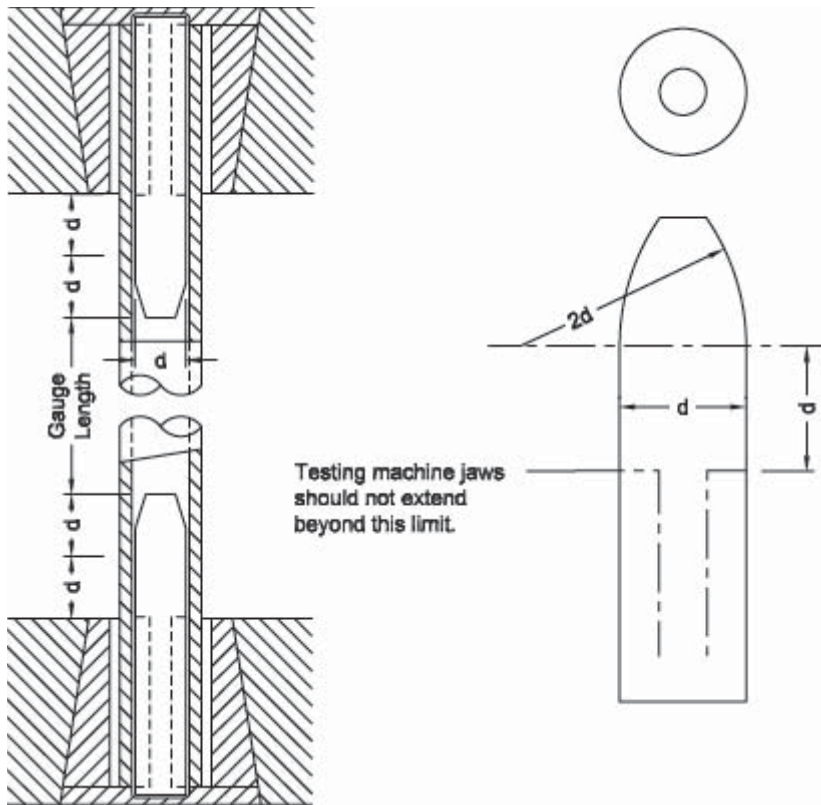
Metal Plugs for Testing Tubular Specimens, Proper Location of Plugs in Specimen and of Specimen in Heads of Testing Machine
